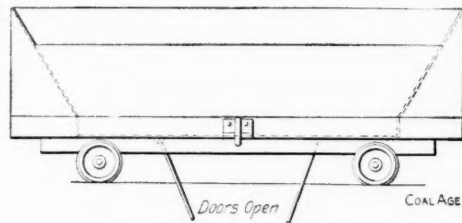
SIDE VIEW OF SAME CONVEYOR
